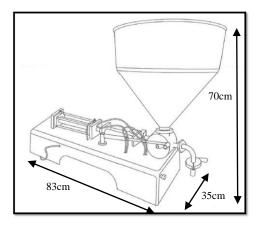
Dimensions of Semi-Automated Paste Filling Machine for Spicy Shrimp Paste
